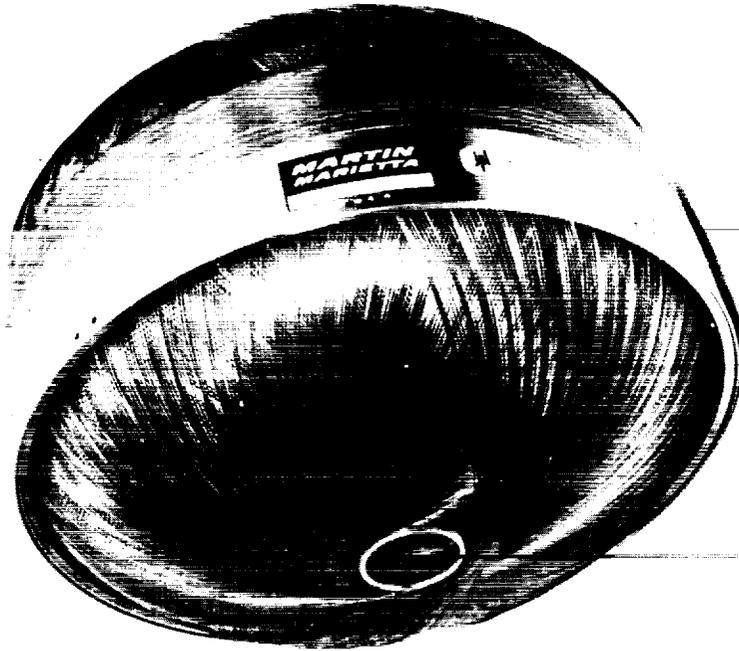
Completed Rocket Motor Case #2 (RMC-2)
